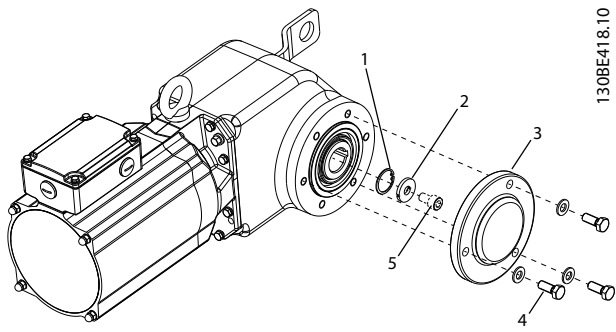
Assembly of the Torque Arm to the VLT® OneGearDrive
